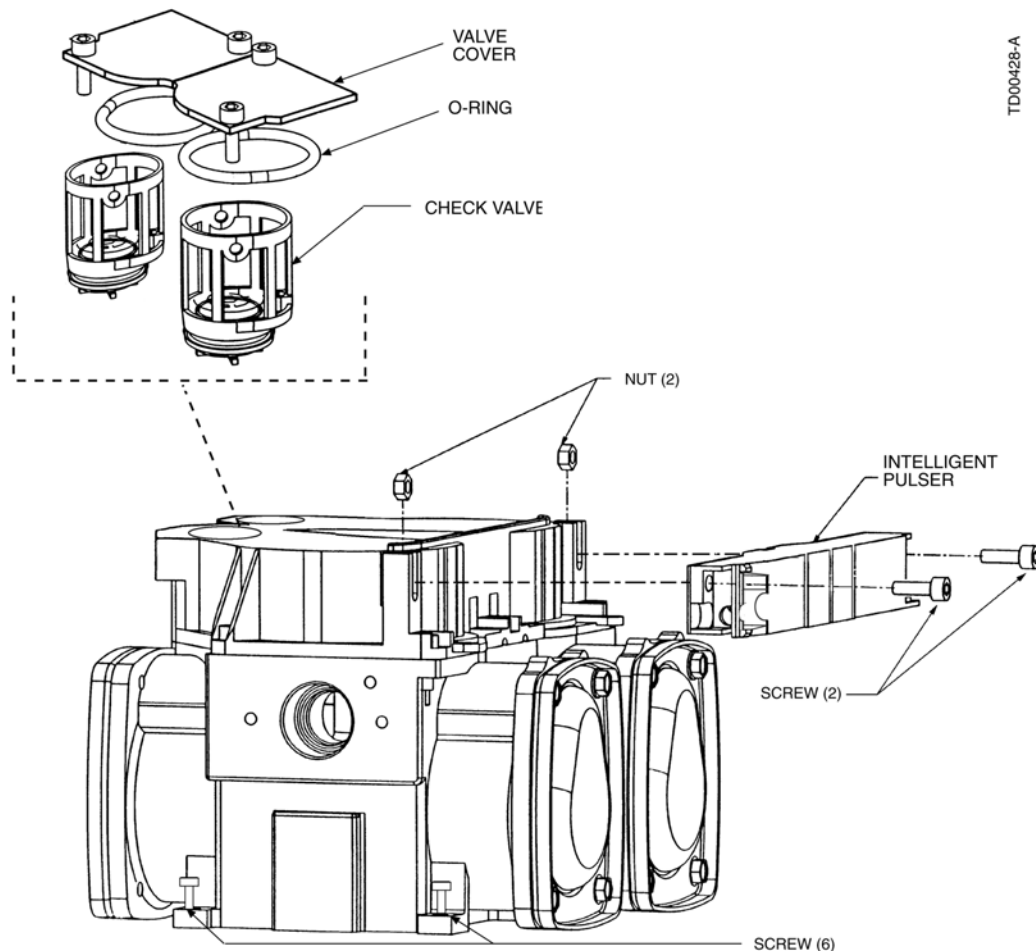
iMETER MODULE SERVICEABLE PARTS. *The replaceable parts on the iMeter module are the pulser, check valves, o-rings and valve covers.
